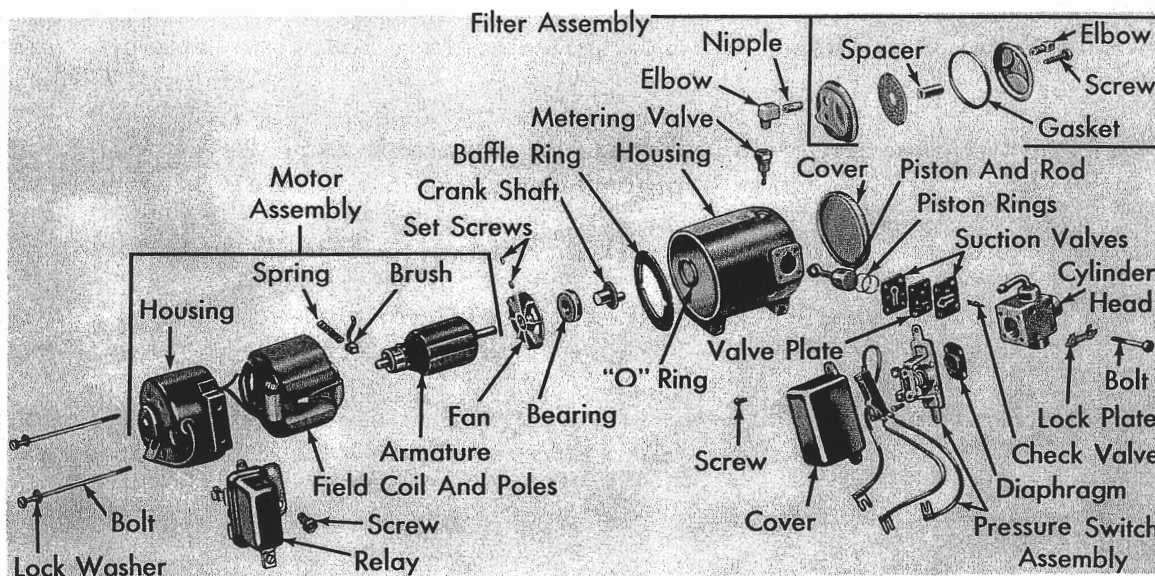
AIR COMPRESSOR - DISASSEMBLED
